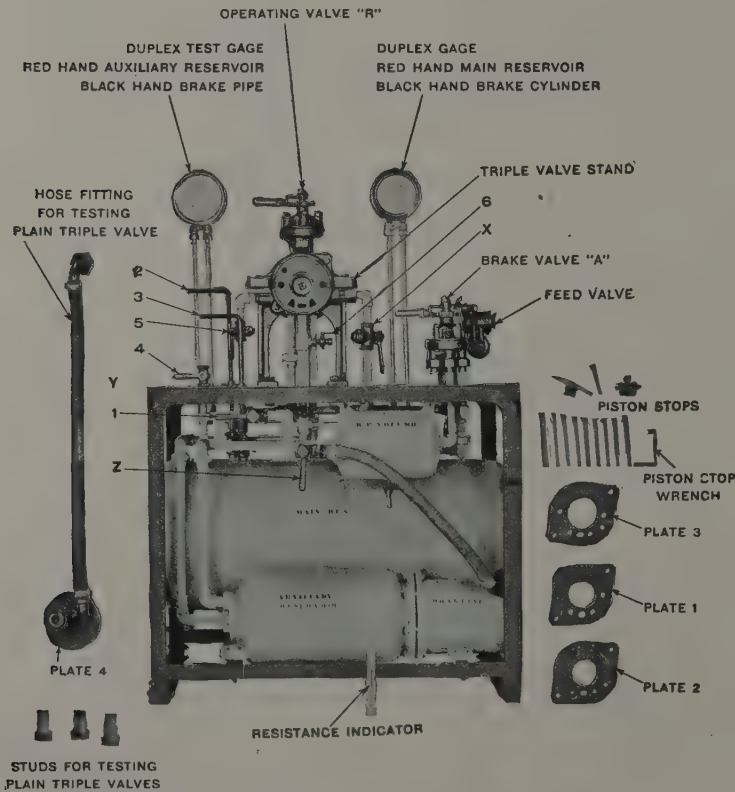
Westinghouse No. 3-T Triple Valve Test Rack.
